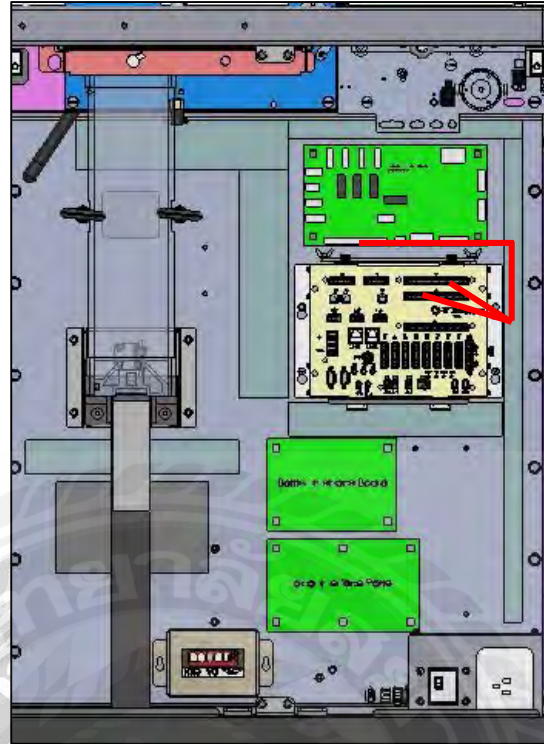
Cable Routing for STE 9812-0510 REV01
